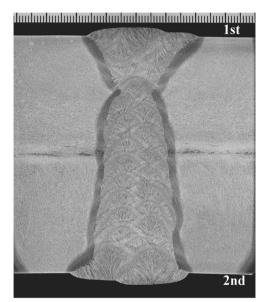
Cross-sectional macrograph of both side butt joint welding
